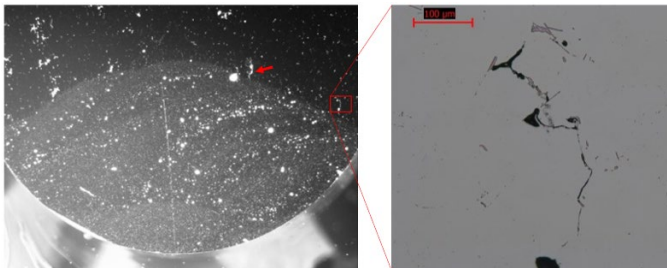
2319 cracking/melting near the weld interface.
